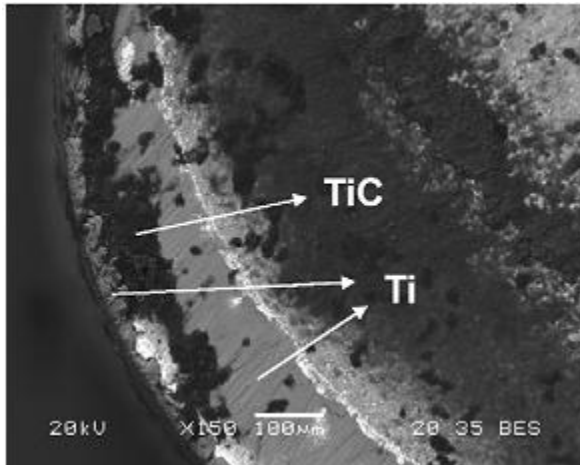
Adhered workpiece material on to tool cutting edge [12].
